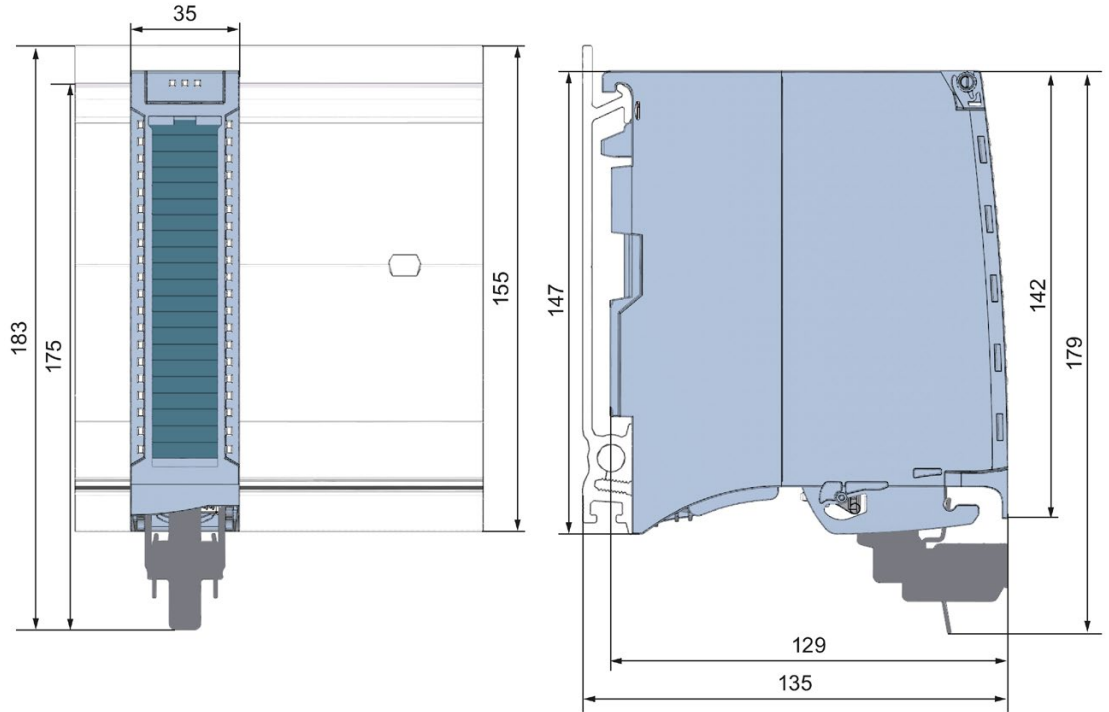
Dimensional drawing of the TM Timer DIDQ 24x24V technology module
